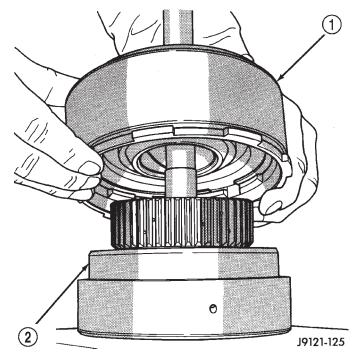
Separating Front/Rear Clutch Assemblies 1 – FRONT CLUTCH
